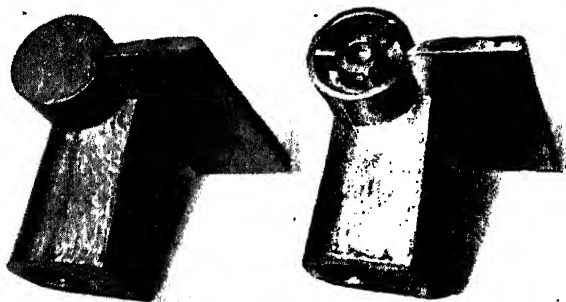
Aluminium bronze gravity die-castings showing how the design was amended to prevent porosity
